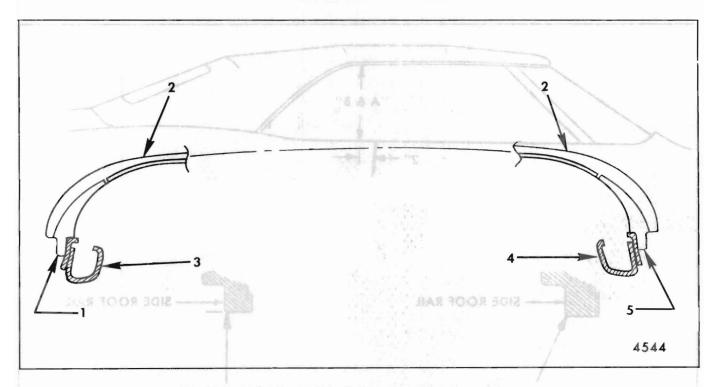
Cross Section of Side Rail to Center Bow Stop Alignment
